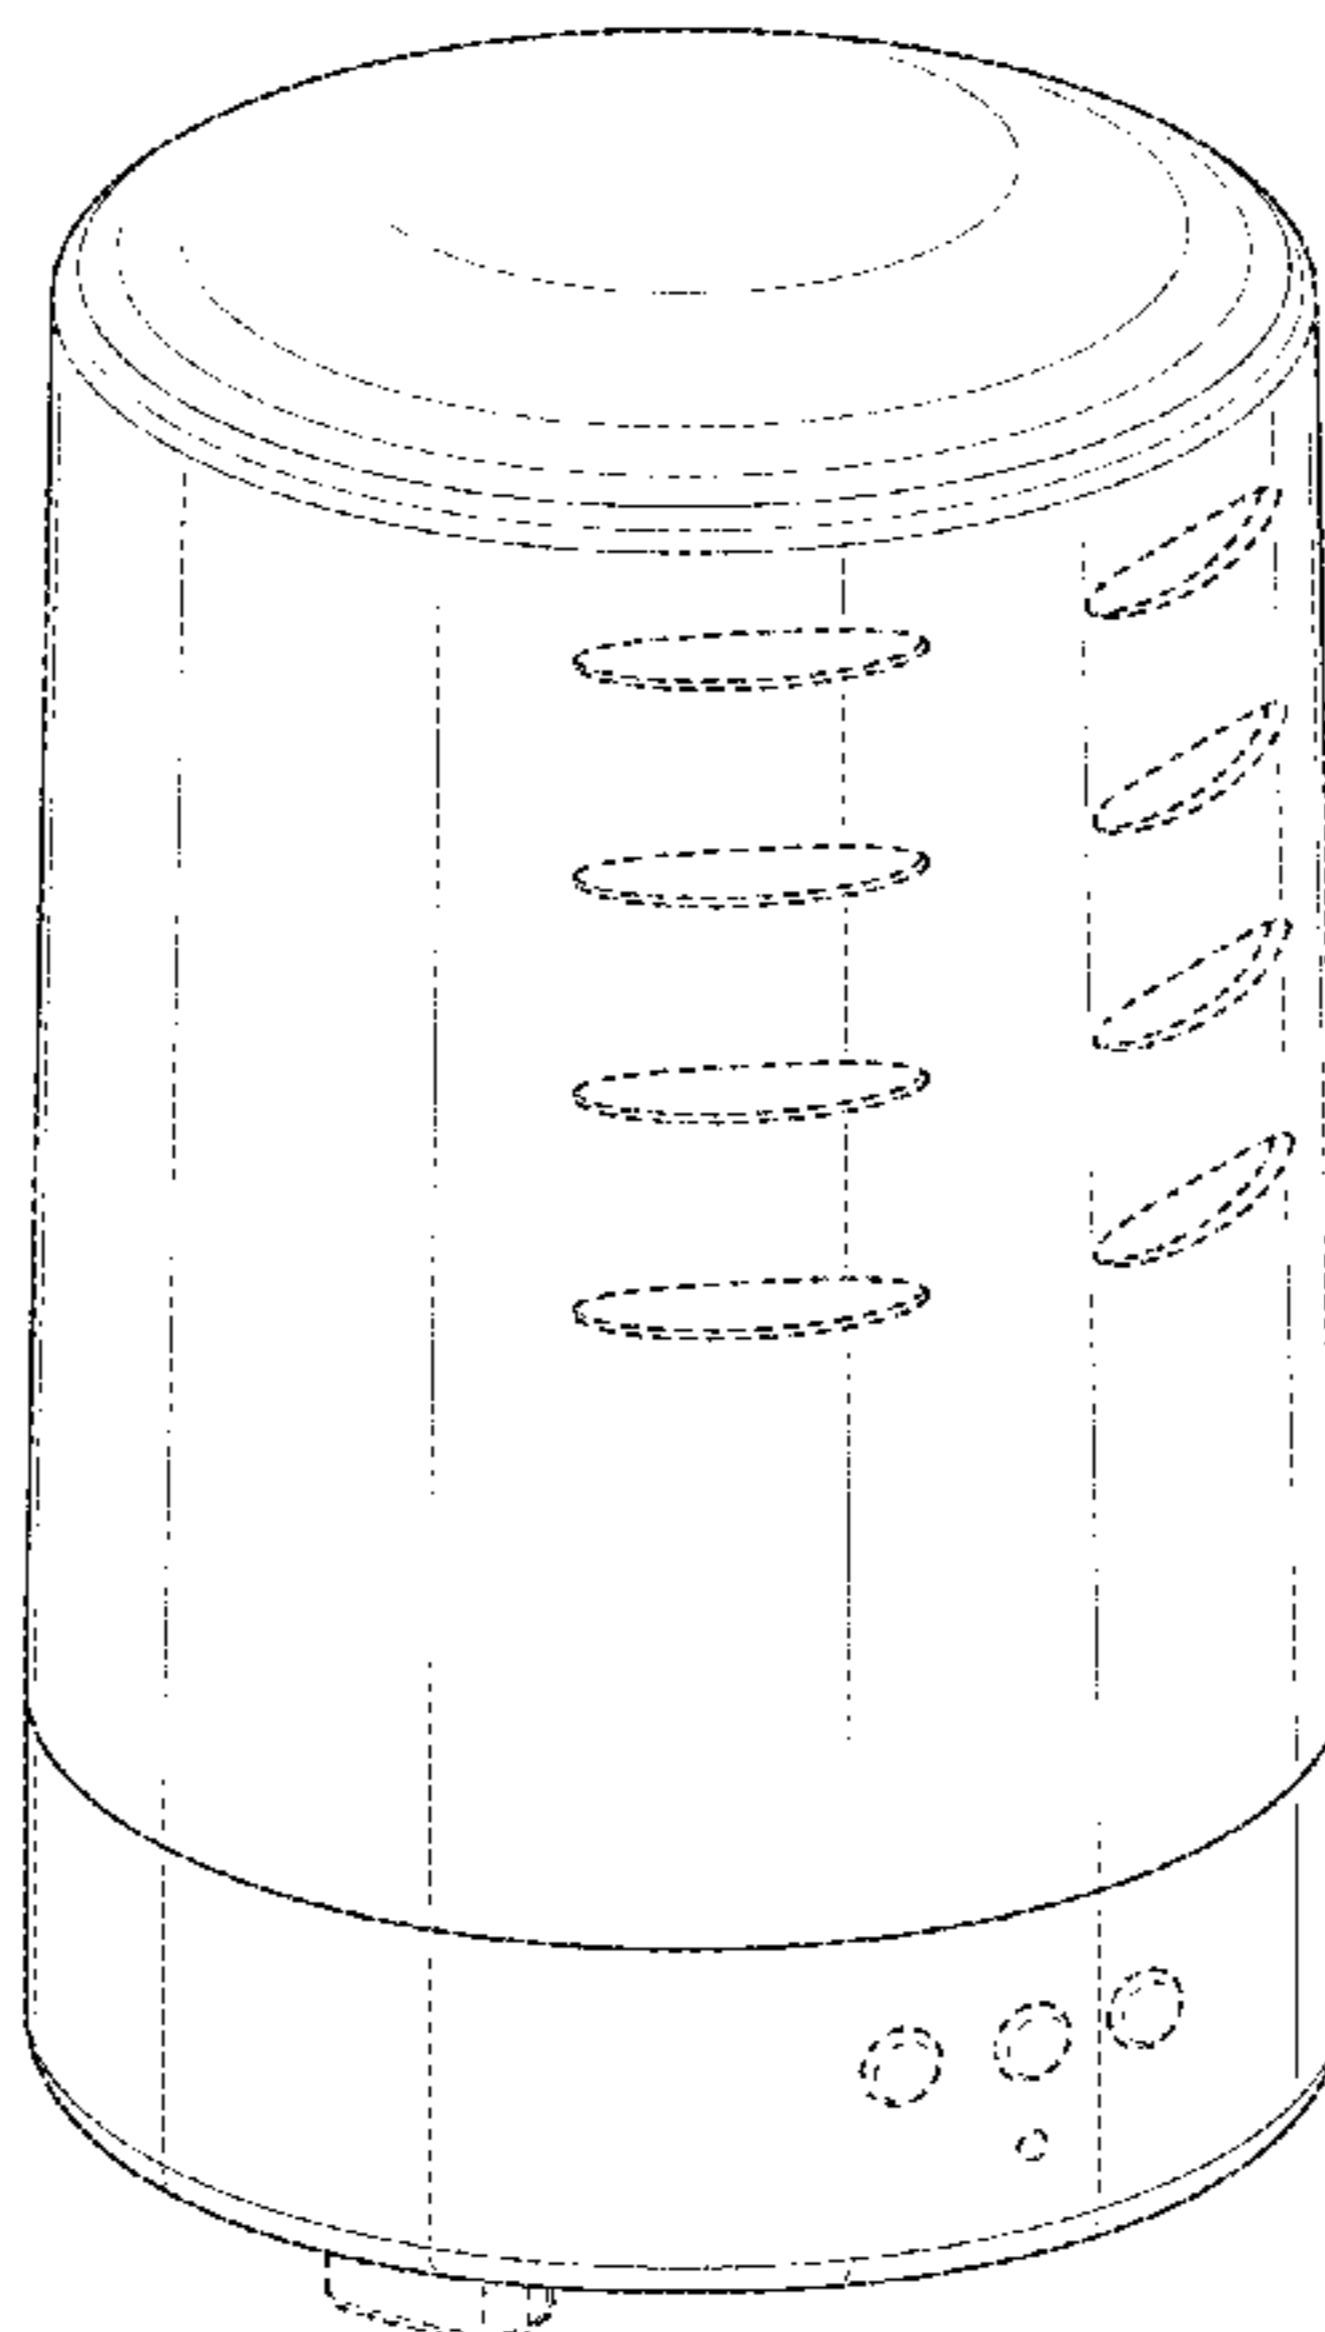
is a right side view of the housing for a sleep enhancement diffuser device of FIG. 1.
